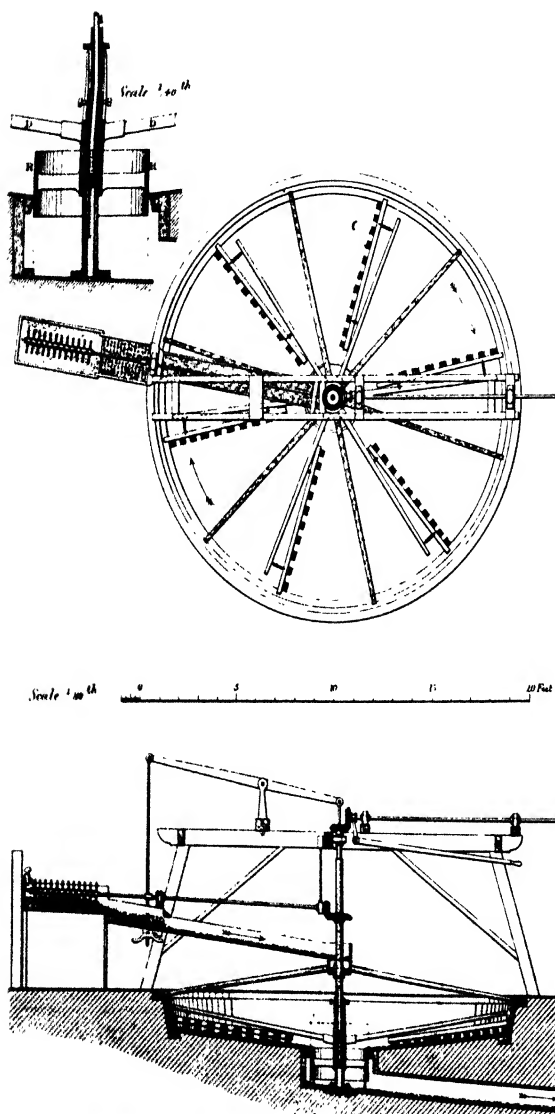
Bortase's bucket. Plan and sectional elevation.
